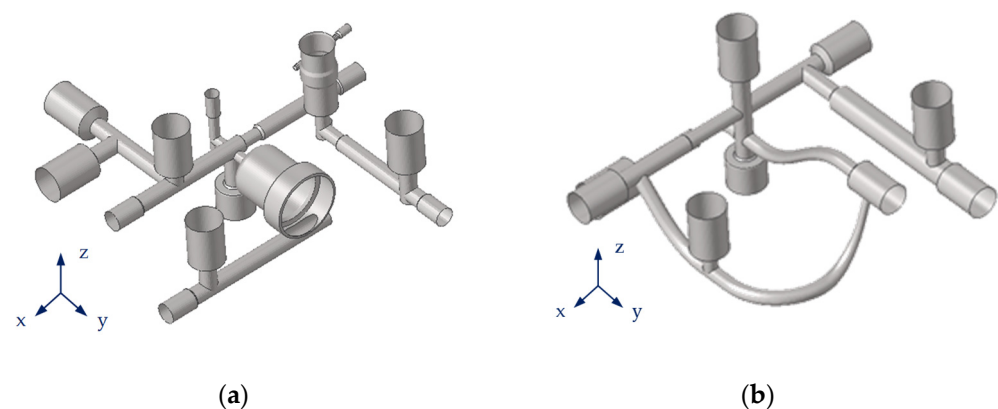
Details of the hydraulic manifold channels: (a) former geometry; (b) after the optimization.
